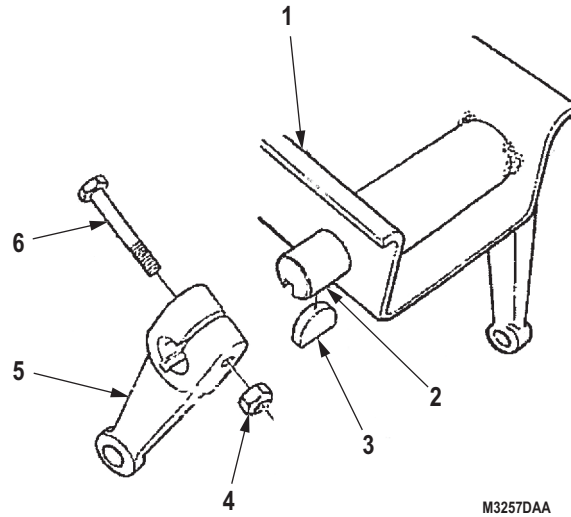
Cross Shaft Lever and Cross Shaft Removal.
